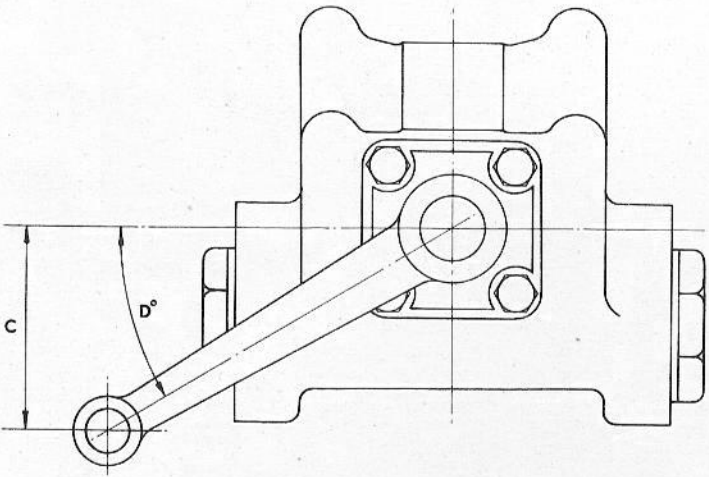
KERB WEIGHT SETTING OF MAINSHAFT AND ARM.
